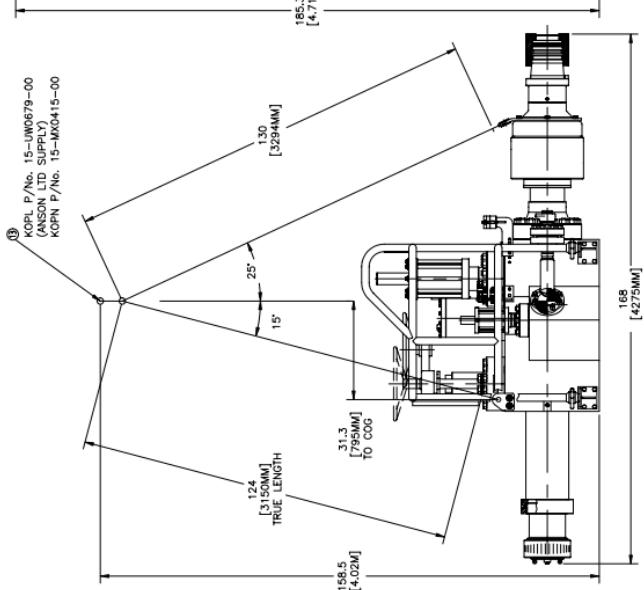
UW0375-00 / AO32-2-102-010-LN-10-DK-012 (Sheet 2/7)
